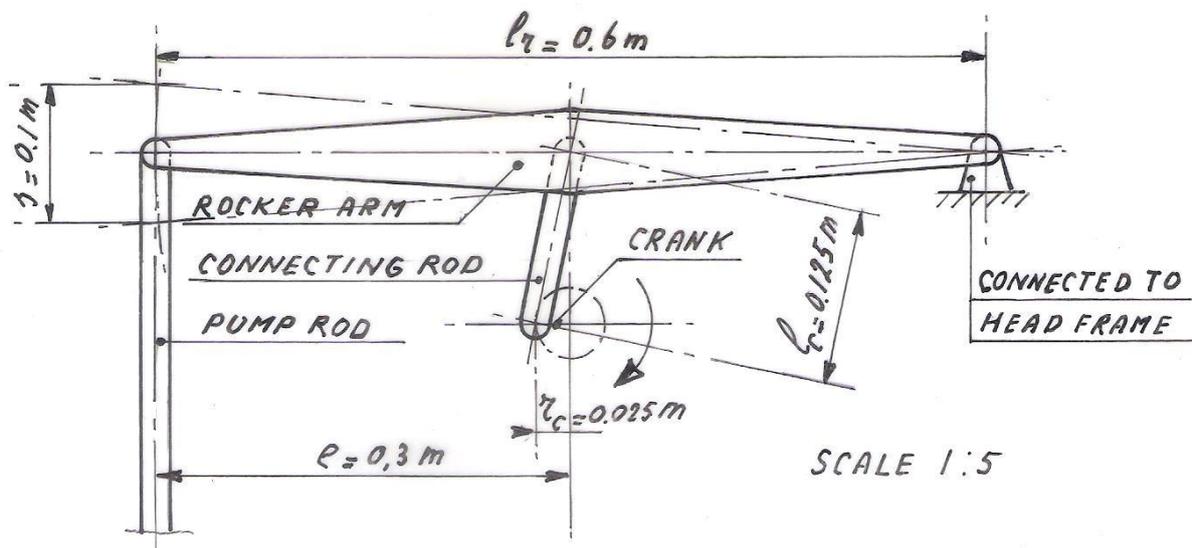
Rocker arm transmission in between the rotor shaft and the pump rod
